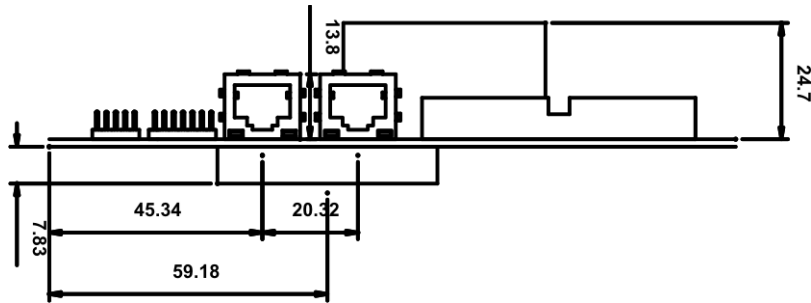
3308050 External Interface Connector Dimensions (mm)
